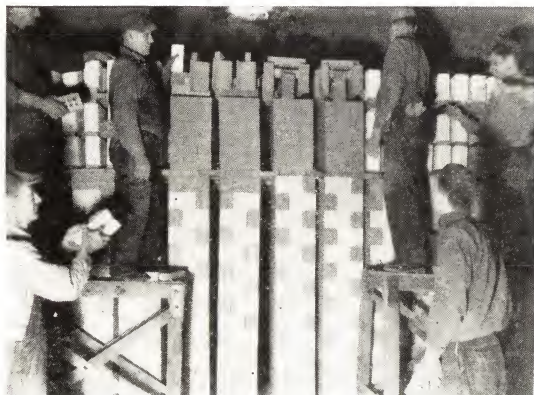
Stacking glazed brick in a beehive type of kiln.
